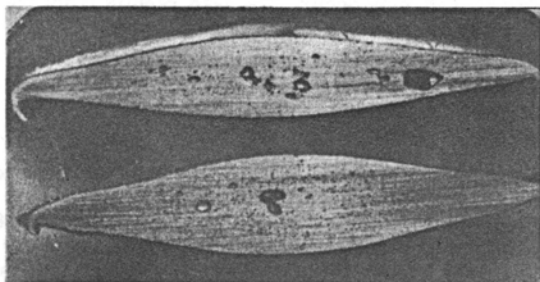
Section F (top), and section D (bottom), showing porosity and casting voids typical of the metal in the various sections examined
